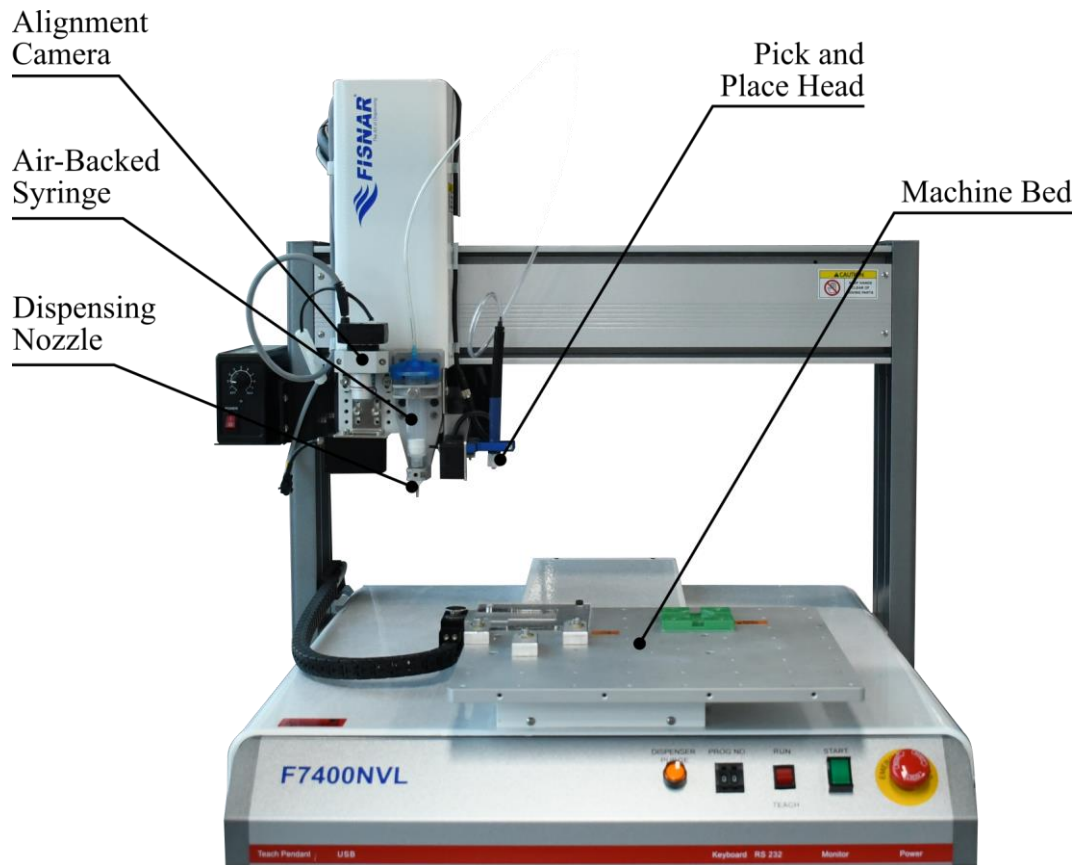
Fisnar F7400NVL robotic dispensing machine
